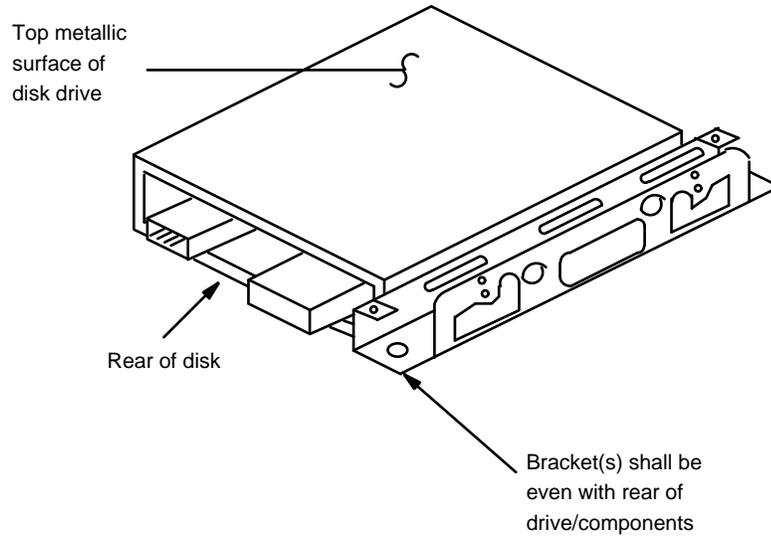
Drive Unit Flush with Mounting Rail Ends
